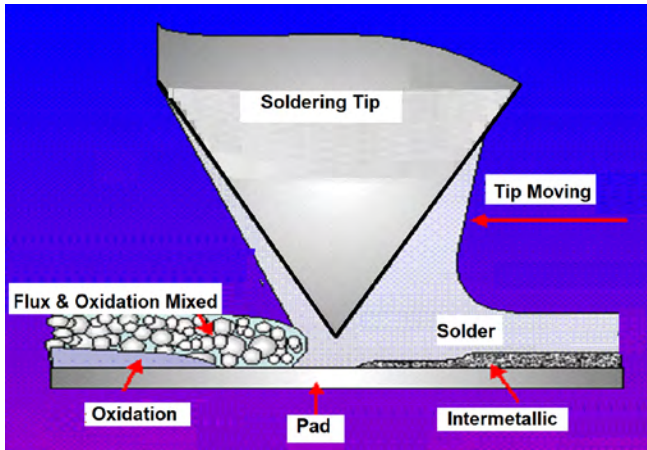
Components of a good solder joint and their relative placement during the creation of a solder joint.
